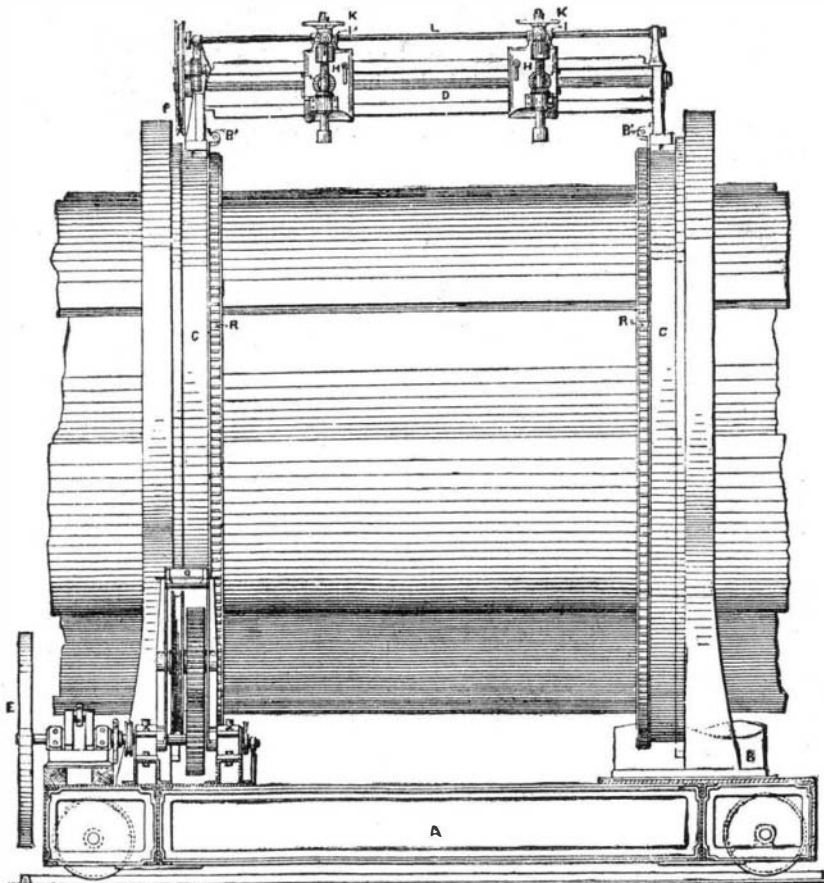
SIDE ELEVATION OF TUBE DRILLING MACHINE.
